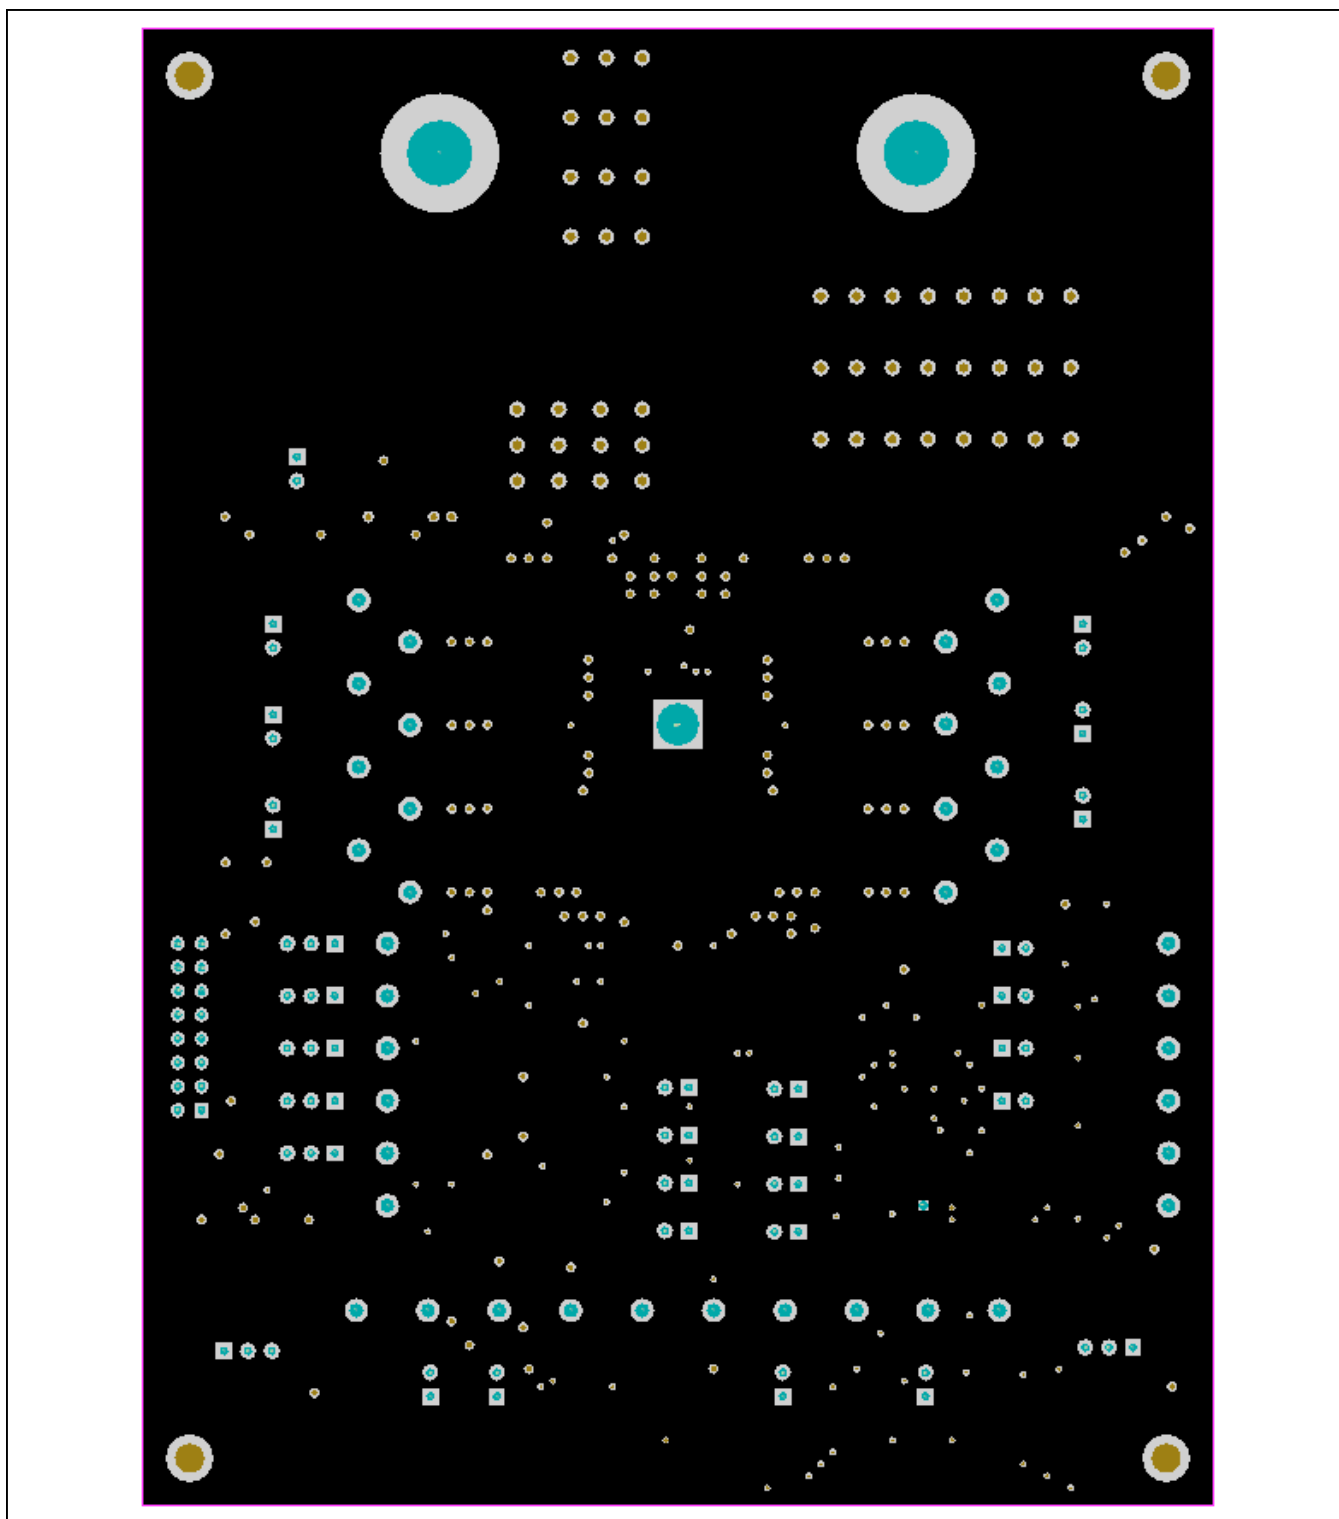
MAX14900E EV Kit PCB Layout, Internal Plane 2—GND
